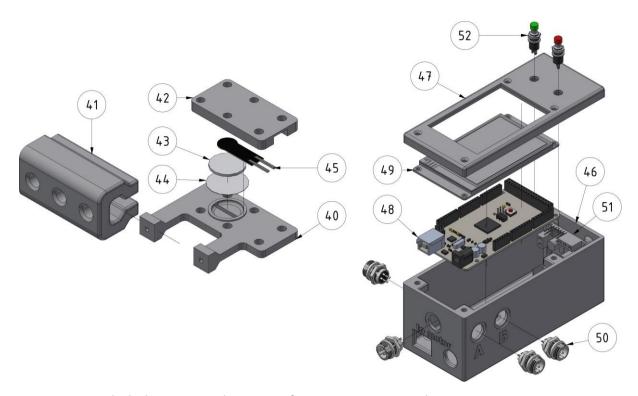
Exploded-view CAD drawings of pressure sensor and case.
